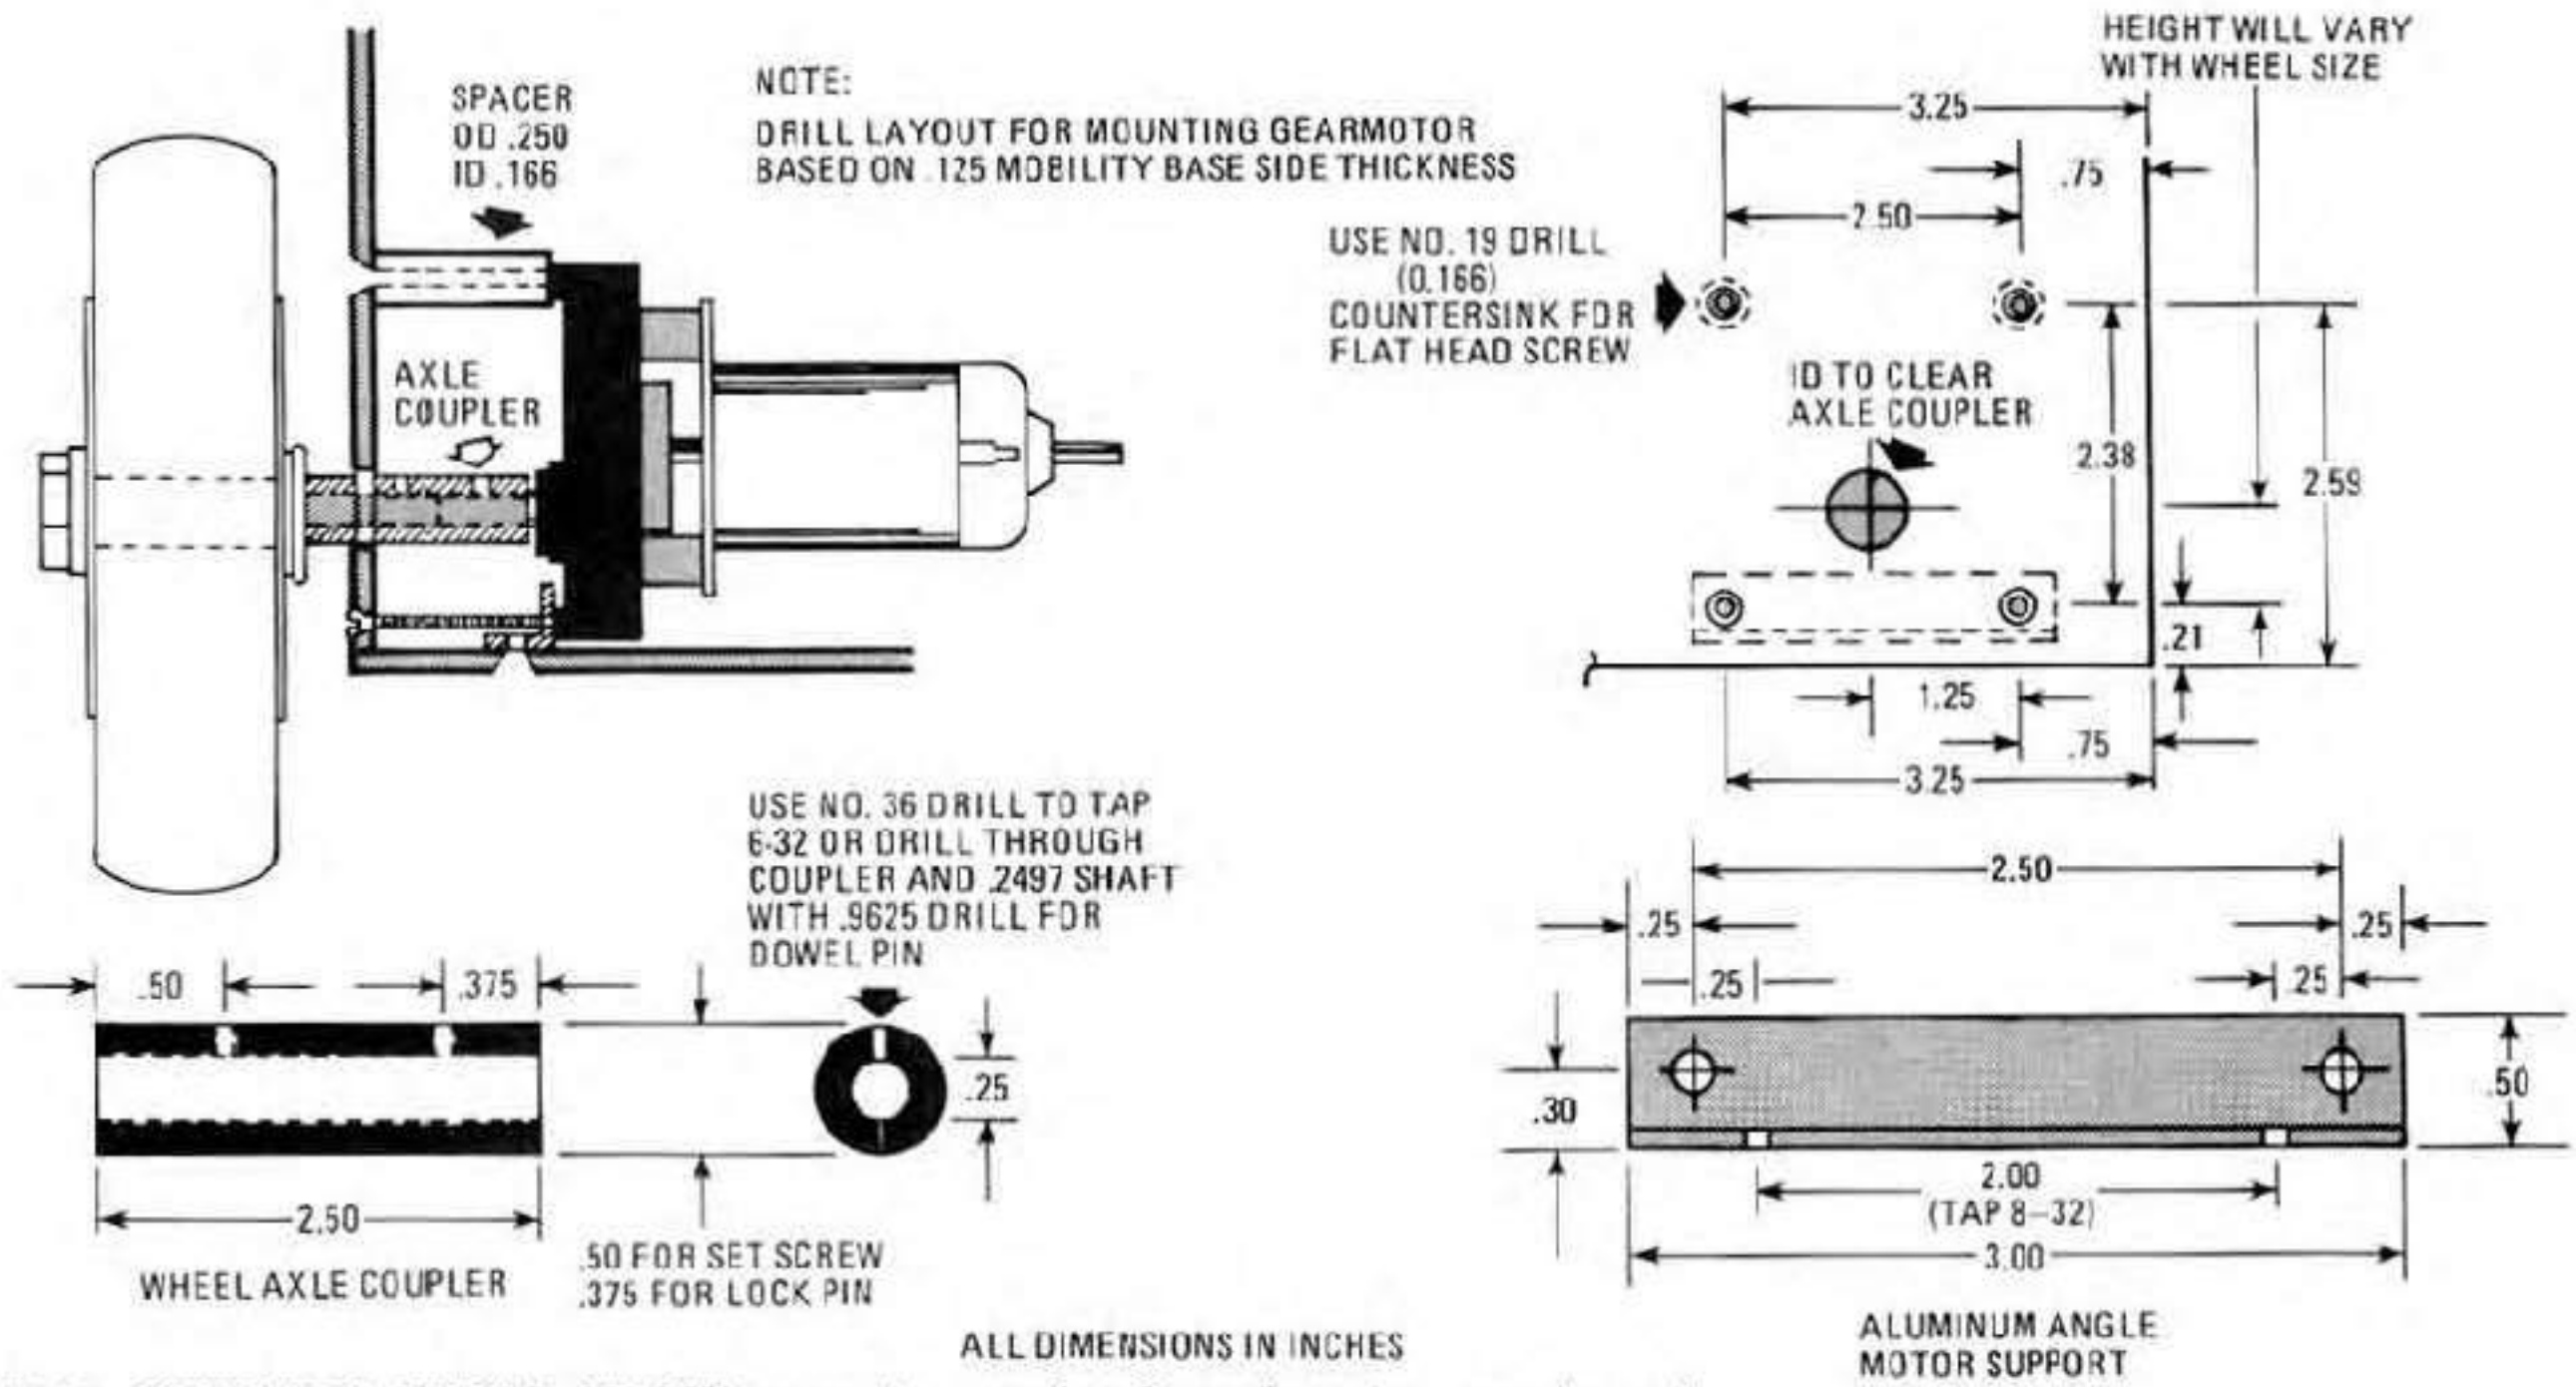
MECHANICAL DETAILS of 22-RPM gear-motor mounting. Some dimensions may change if sizes of wheel or wheel-shaft you use differ from those used by author.
